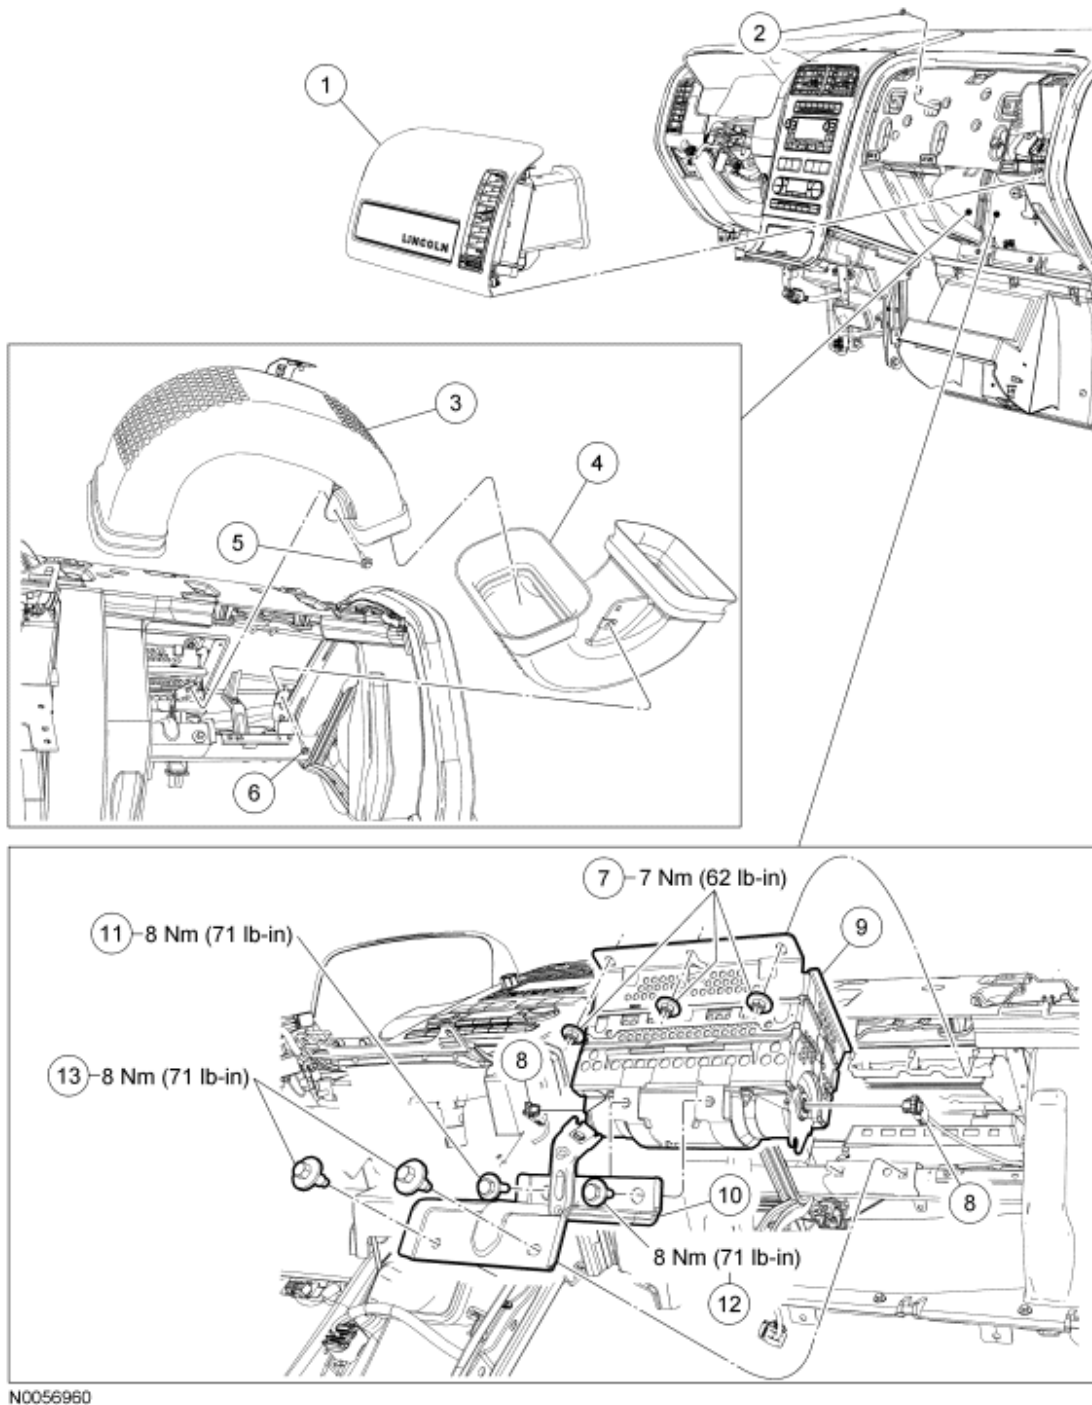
Exploded View Of Passenger Air Bag Module With Torque Specifications - MKX
